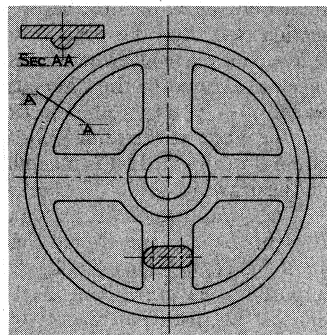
REVOLVED SECTION (LOWER SPOKE) AND REMOVED SECTION (THROUGH WHEEL RIM AT A-A); REMOVED SECTION IS DRAWN TO LARGER SCALE
